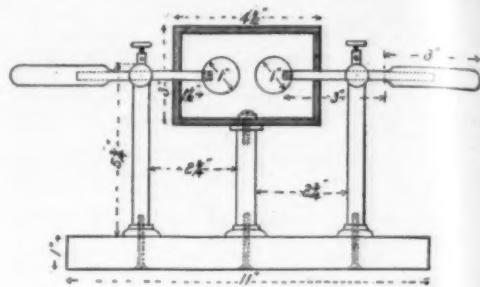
SIDE ELEVATION OF SPARK GAPS.
